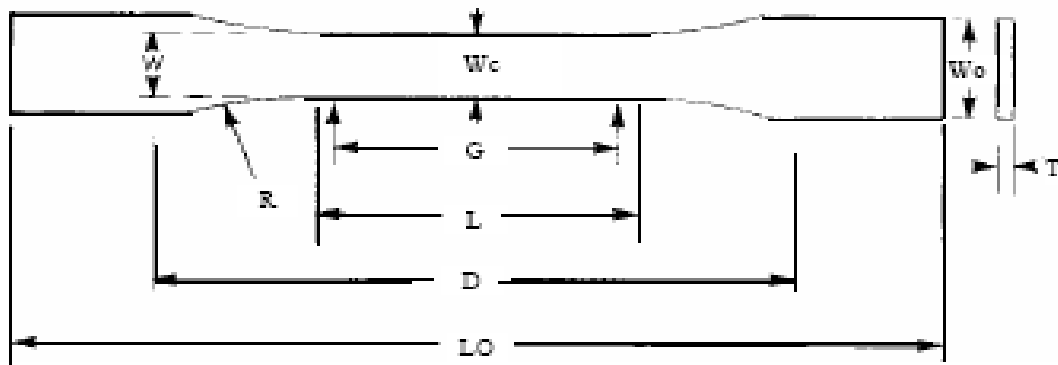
Dumbbell Shaped Specimen [ASTM (D638)]
